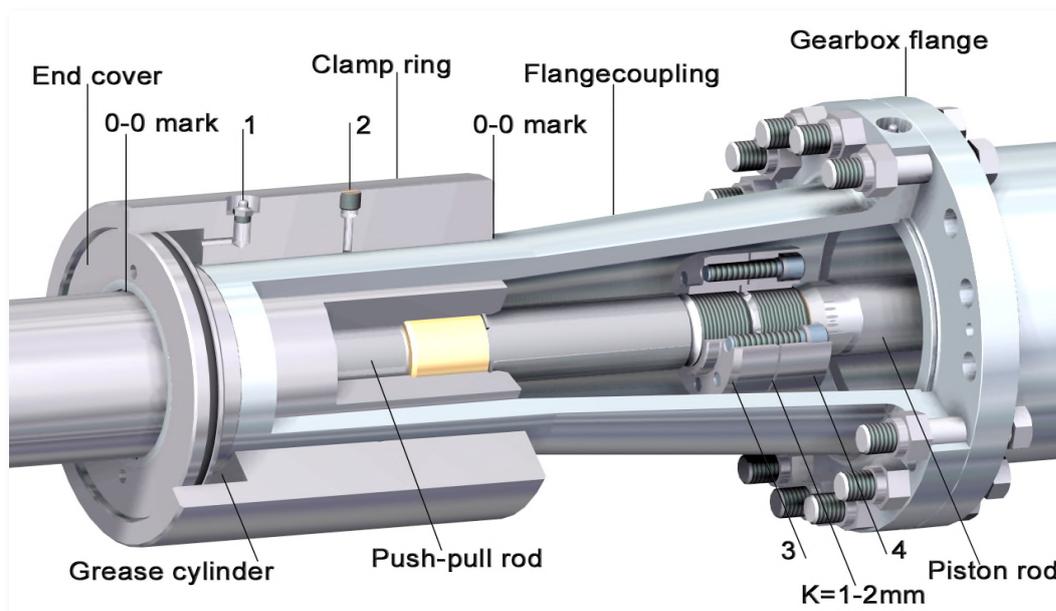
The different parts of inner shaft flange and push-pull rod connection to the piston rod
